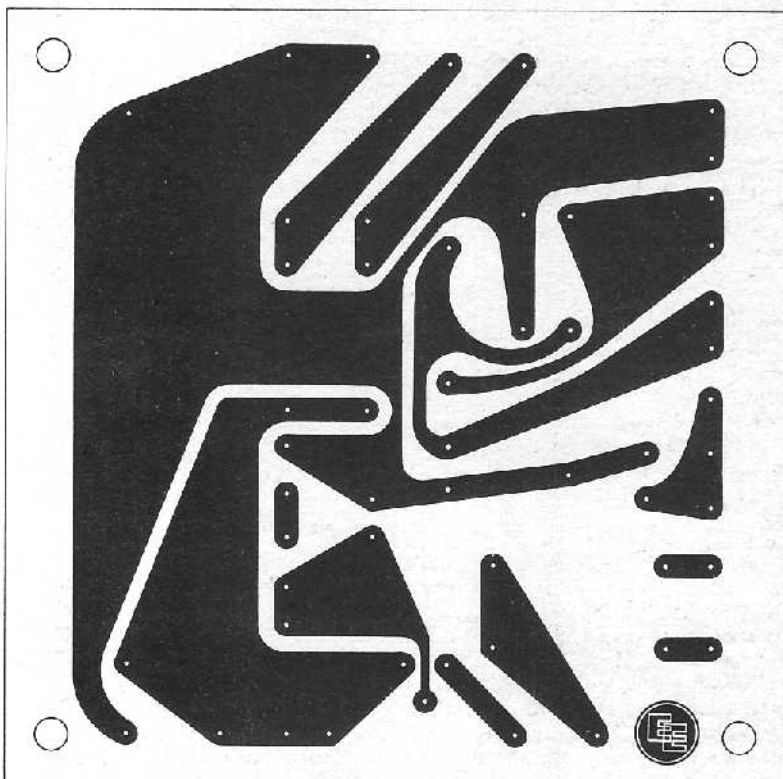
Foil pattern for the p.c.b. shown actual size. Below this is the component layout and transistor and i.c. outlines. Note that the rectifier diodes D1 to D4 should be mounted clear of the board as should R2.
